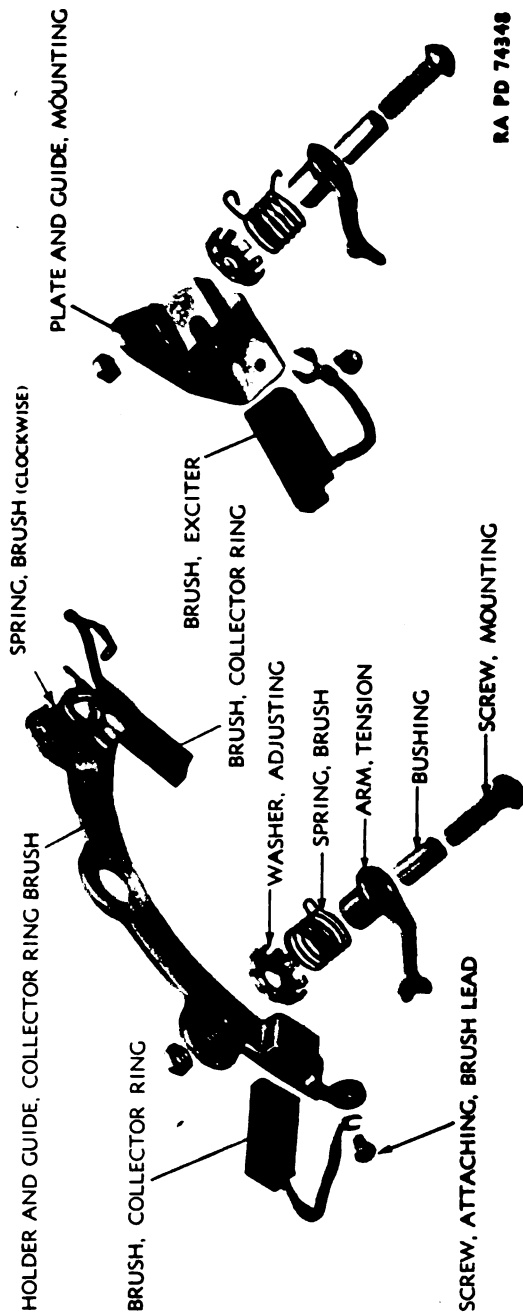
Brush-holder Assembly (H. B. Co. Unit) — Exploded View
